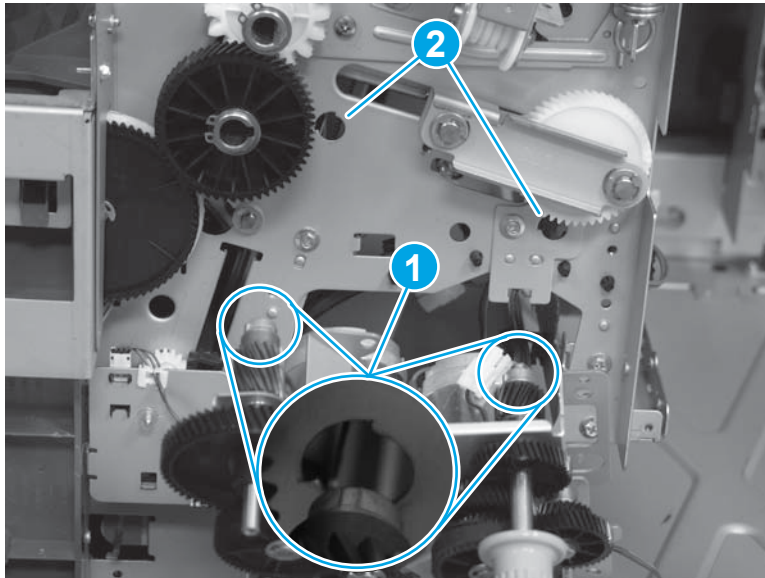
Remove the folding-motor mount assembly (6 of 6)
